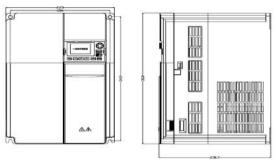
HE100 plastic 30-37KW structure external dimension and installation dimension diagram
